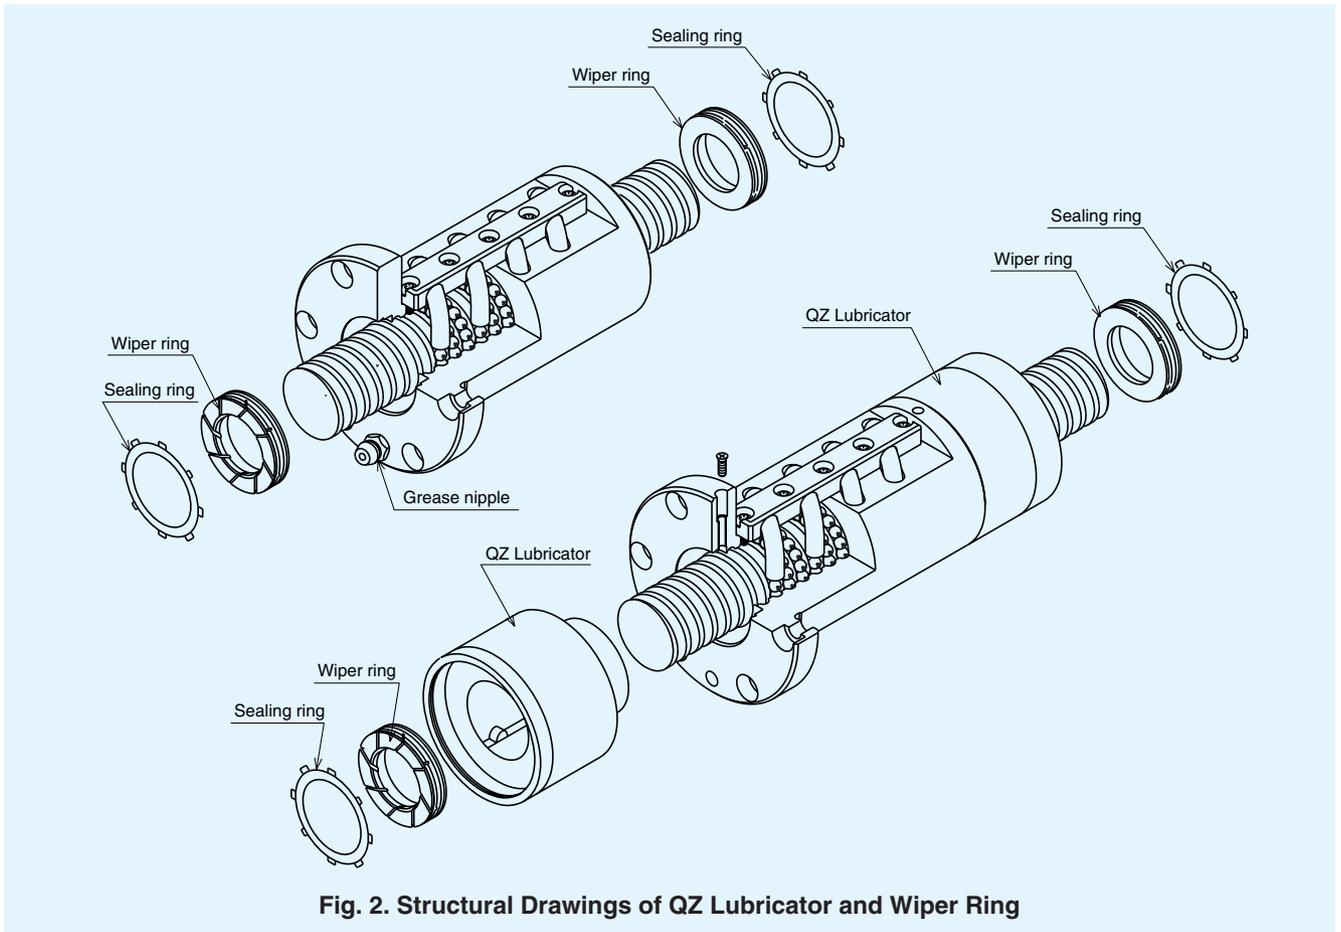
Structural Drawings of QZ Lubricator and Wiper Ring
